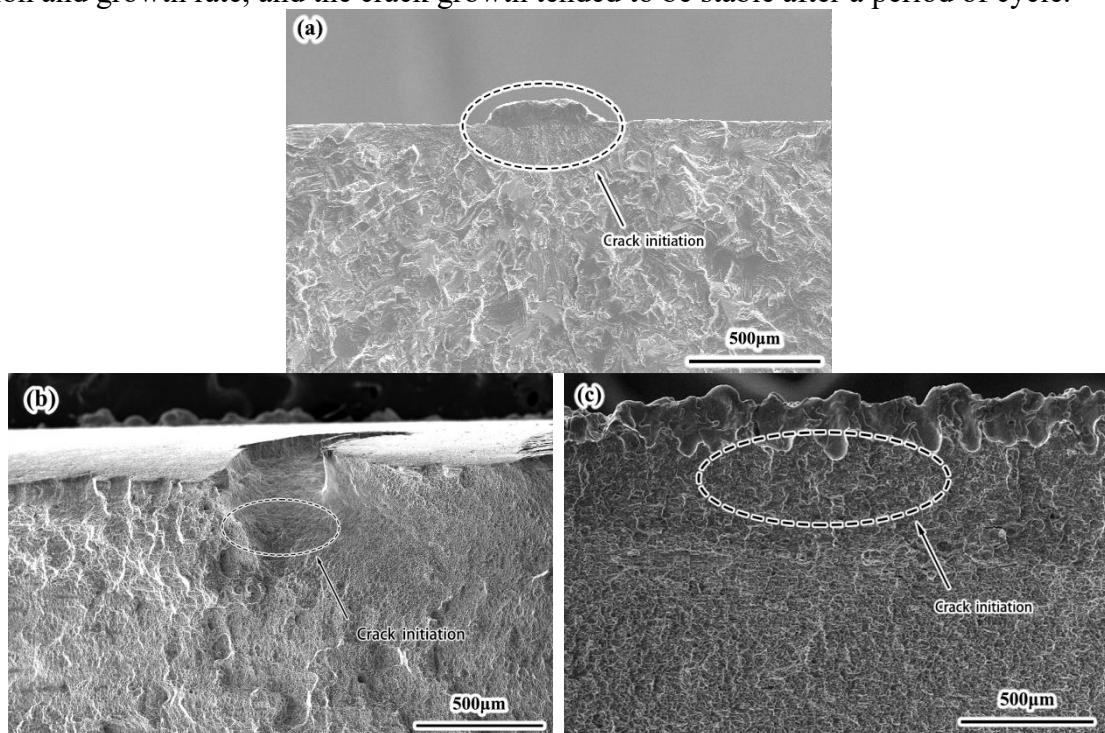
Fatigue fracture of TA15 titanium alloy after laser marking : unmarked (a)、 shallow (b) and deep (c)
